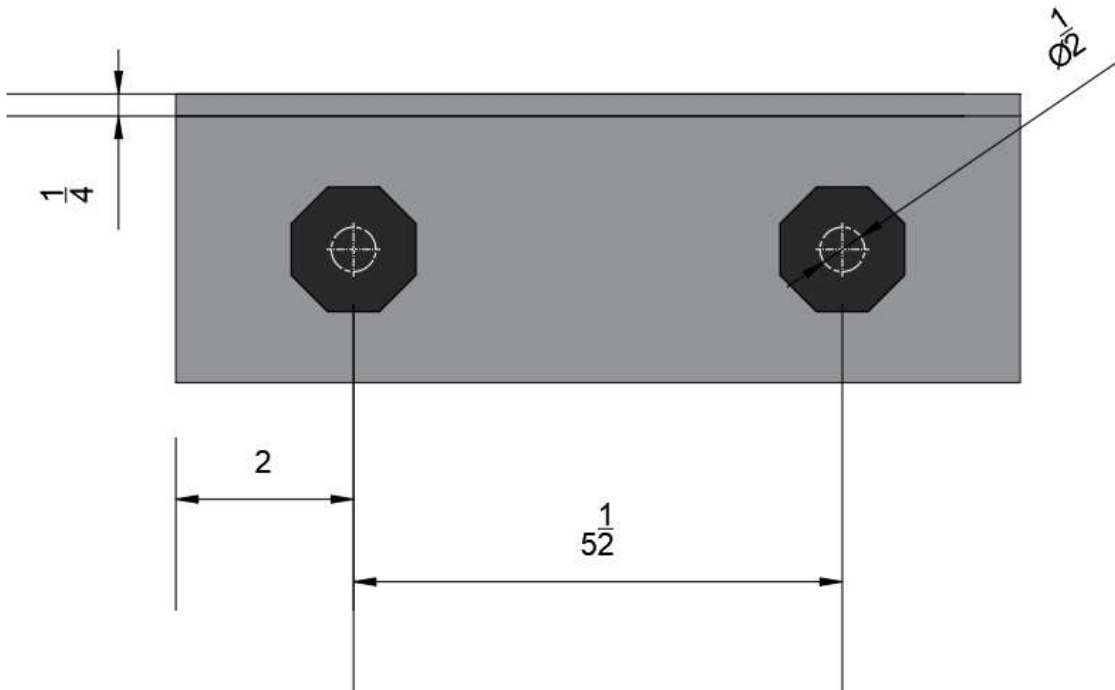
Figure x. Figure 3. Side-View Schematic of Jig Design Including Dimensions
